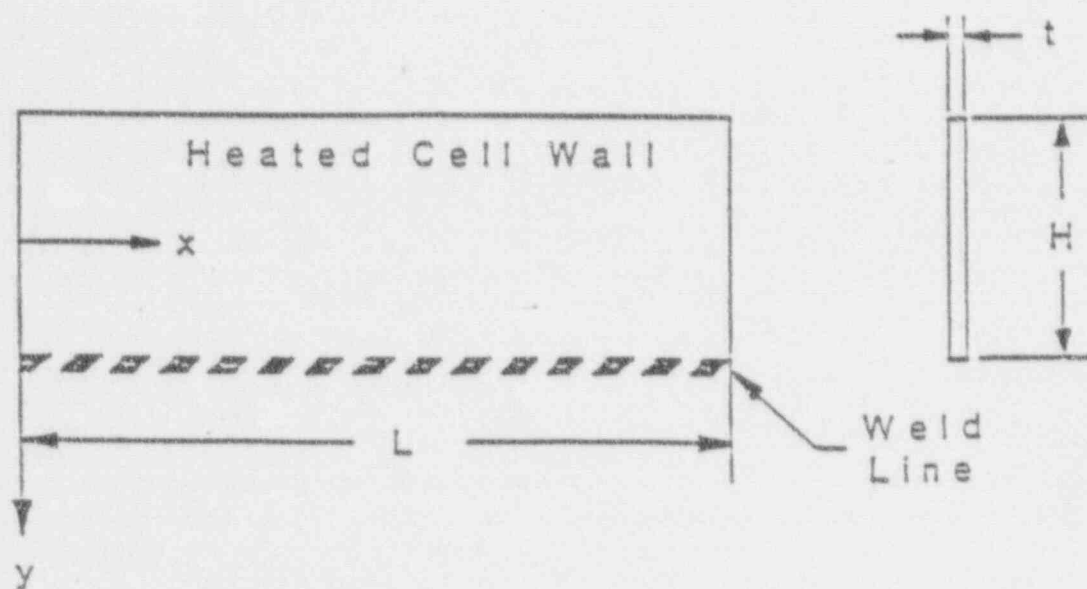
WELDED JOINT IN RACK
